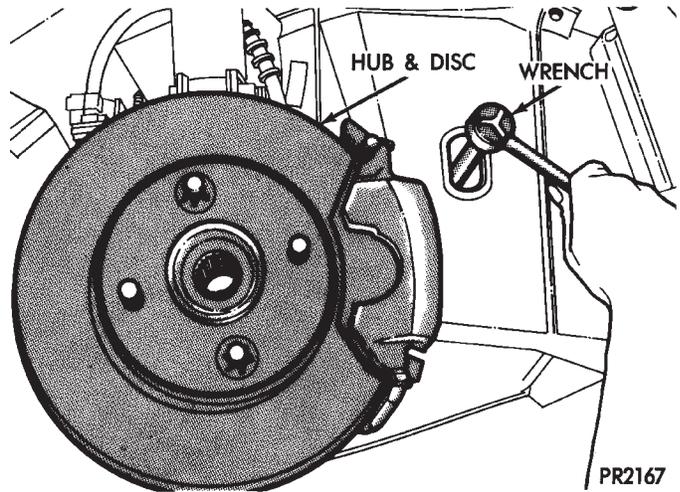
Remove or Install Access Plug in Right Splash Shield to Rotate Engine Crankshaft
